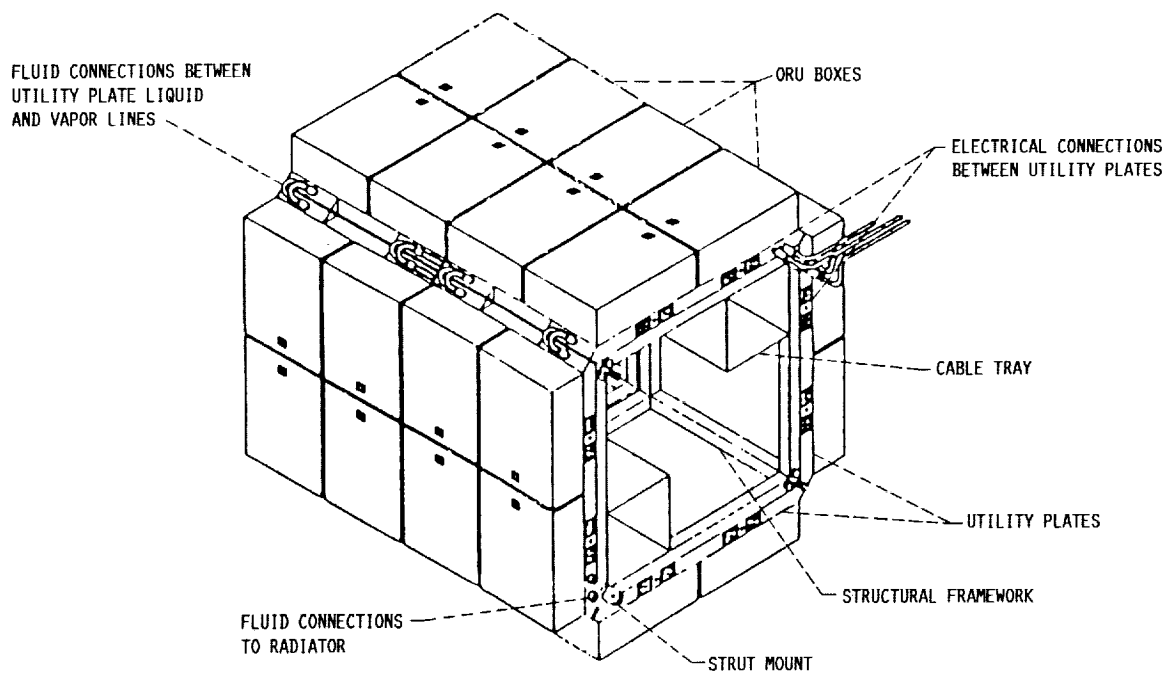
INTEGRATED EQUIPMENT ASSEMBLY.
